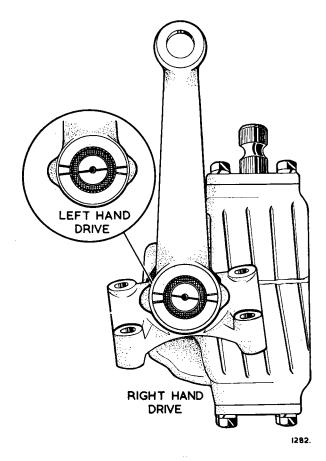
Showing the alignment of the drop arm/rocker shaft marks, both right-hand and left-hand steering
